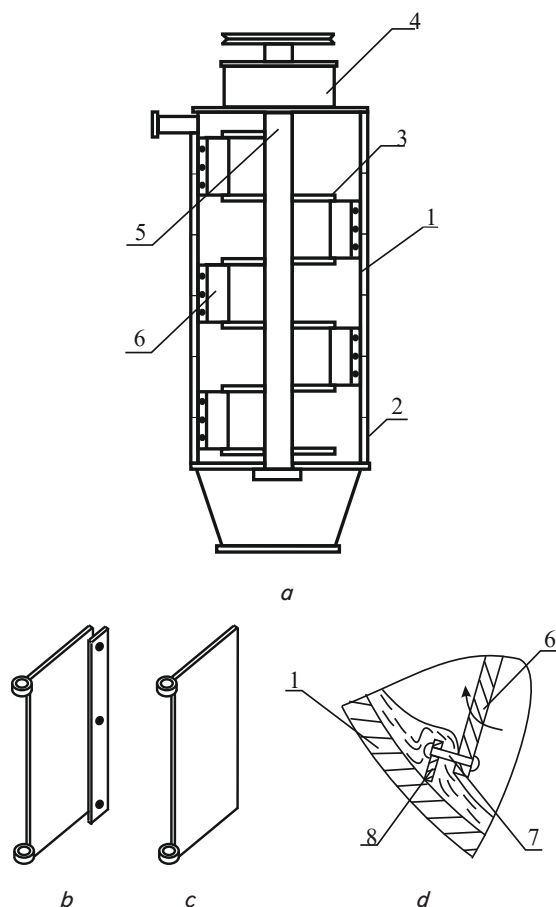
Schematic diagram of the improved model of a scraper heat exchanger: *a* – longitudinal section of the device; *b* – hinged blade with a remote plate; *c* – standard hinged blade; *d* – fragment of the cross-section of the blade with a remote plate: 1 – working cylindrical chamber; 2 – flexible film resistive electric heater of the radiant type (FFREhRT) covered with an additional heat-insulating outer surface; 3 – support disks; 4 – rotating shaft sealing system; 5 – shaft; 6 – hinged blade with a remote plate; 7 – console (rods); 8 – remote plate
